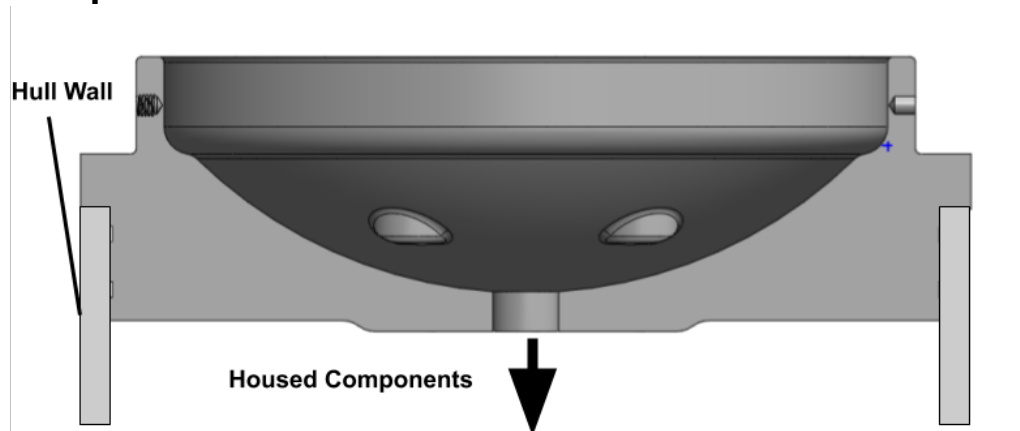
Cross-Section of End Cap to show geometry and circumferential holes
